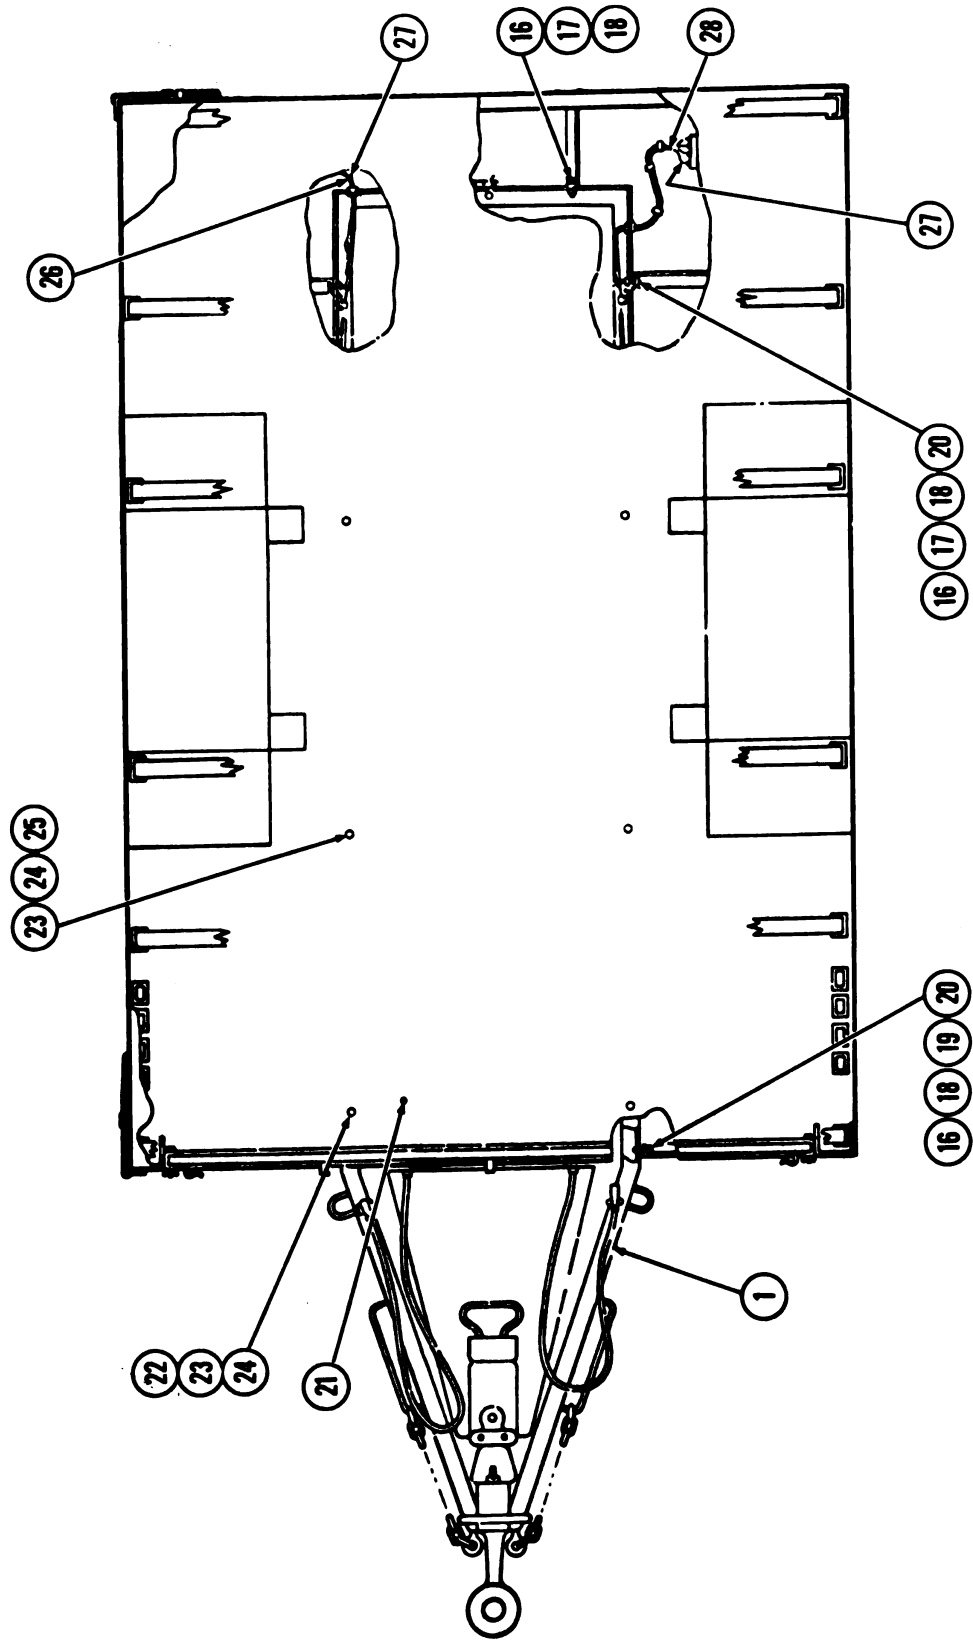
Trailer, Side, Top and Rear Views (Sheet 2 of 3)
